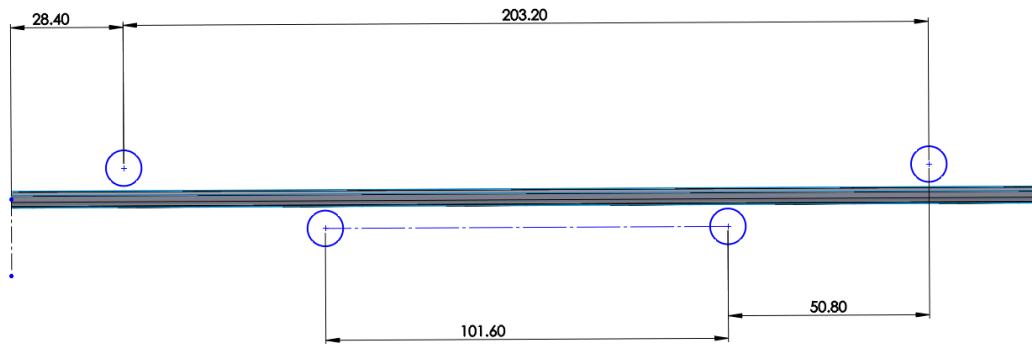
Setup of the four-point bending fixture of CFB as per TAPPI T-811 CM-09.
